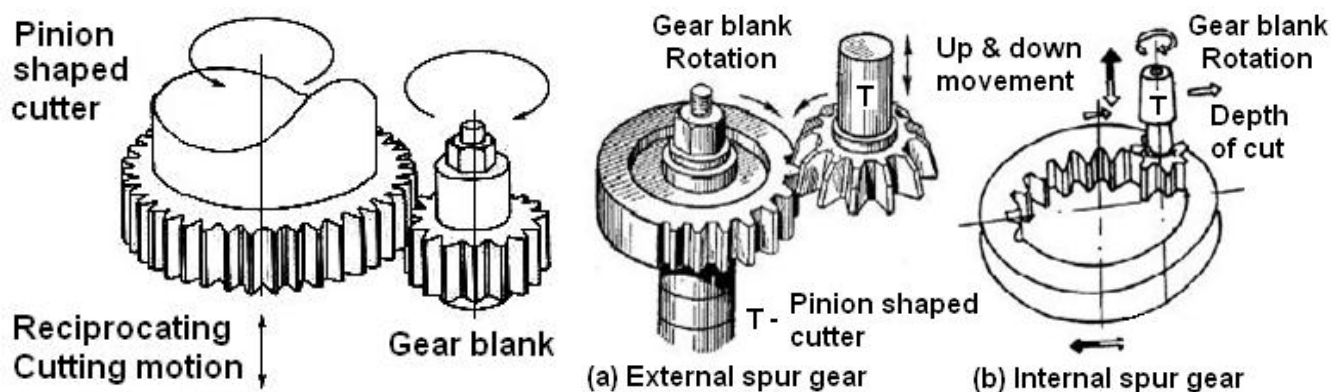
Setup of gear teeth generation by gear shaping operation with a pinion-shaped cutter
